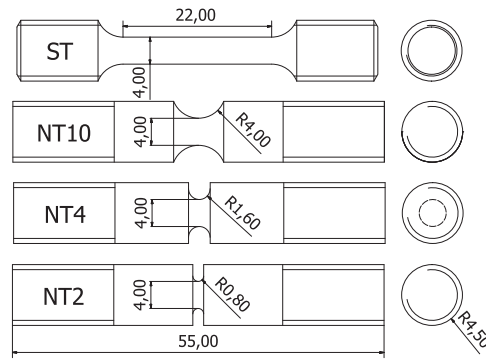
Smooth and notch tensile specimen geometries (dimensions are in mm).
